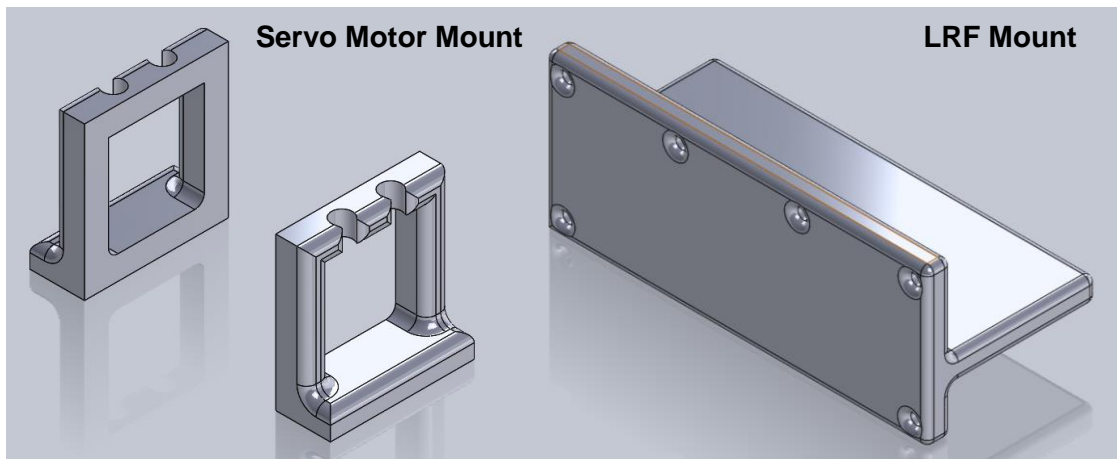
Mounts for Servo Motor and Laser Range Finder Sensor (Photo by Shivam Gautam)
